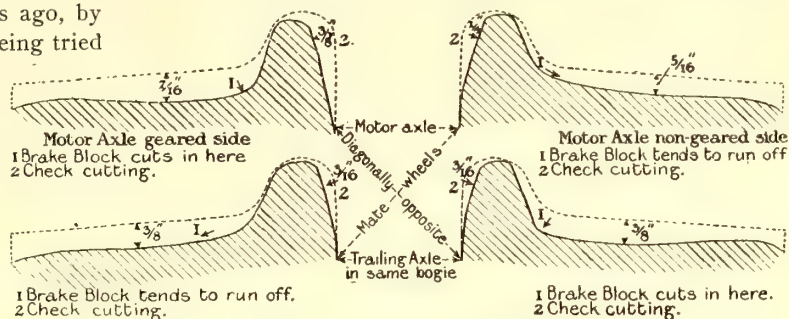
TIRES OF DOUBLE TRUCK EQUIPPED WITH ONE MOTOR
